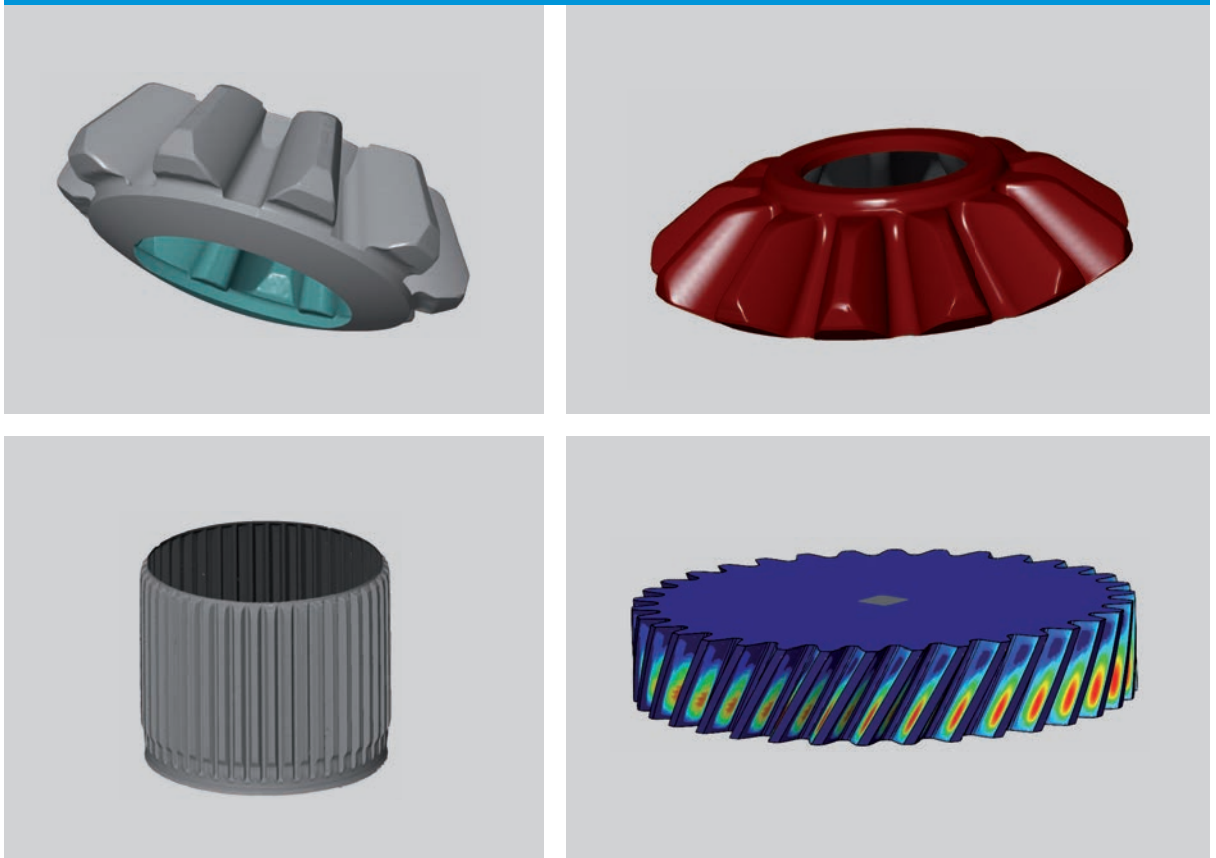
Differential bevel gear (top left), flat side shaft bevel gear (top right), spline (bottom left), cylindrical gear (bottom right)
